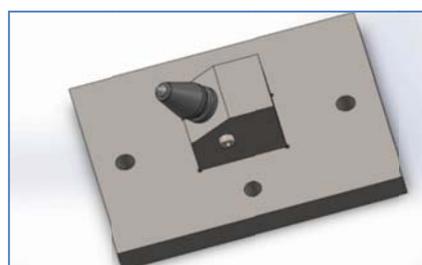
Design of conical tool holding unit that is mounted directly on the dynamometer
